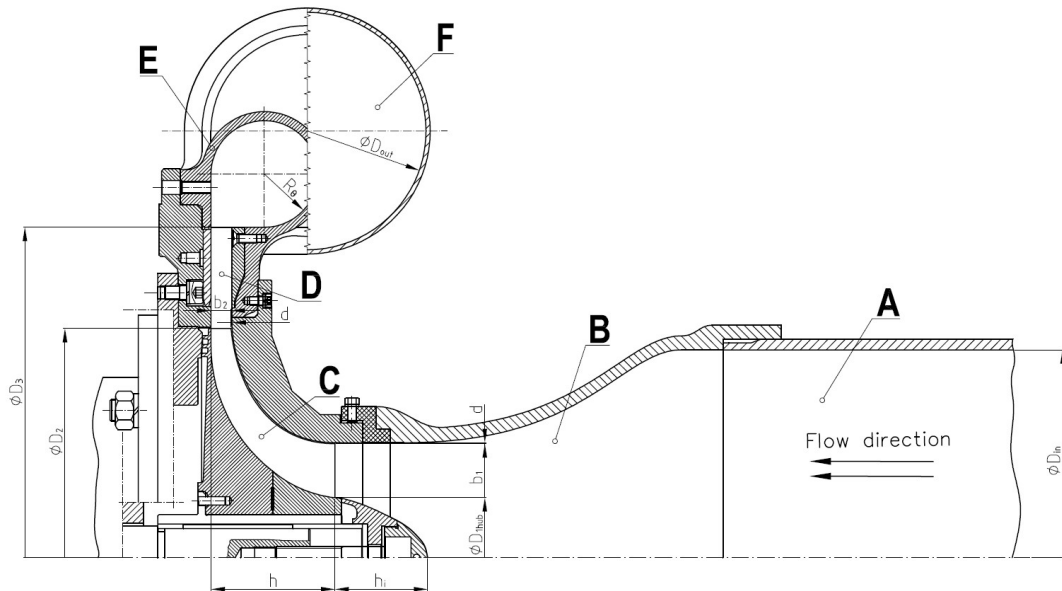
Compressor cross-section with marking of its most important parts [9]; A - inlet pipe, B - Witoszynski nozzle, C - impeller, D - diffuser, E - volute, F - outlet pipe
